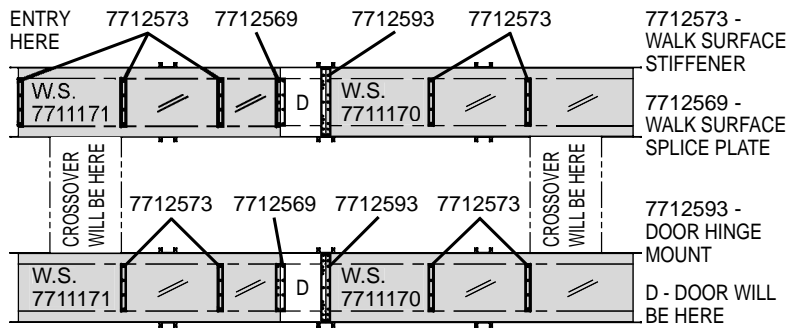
24' Catwalk Floor Structure Parts Required Layout, Top View
